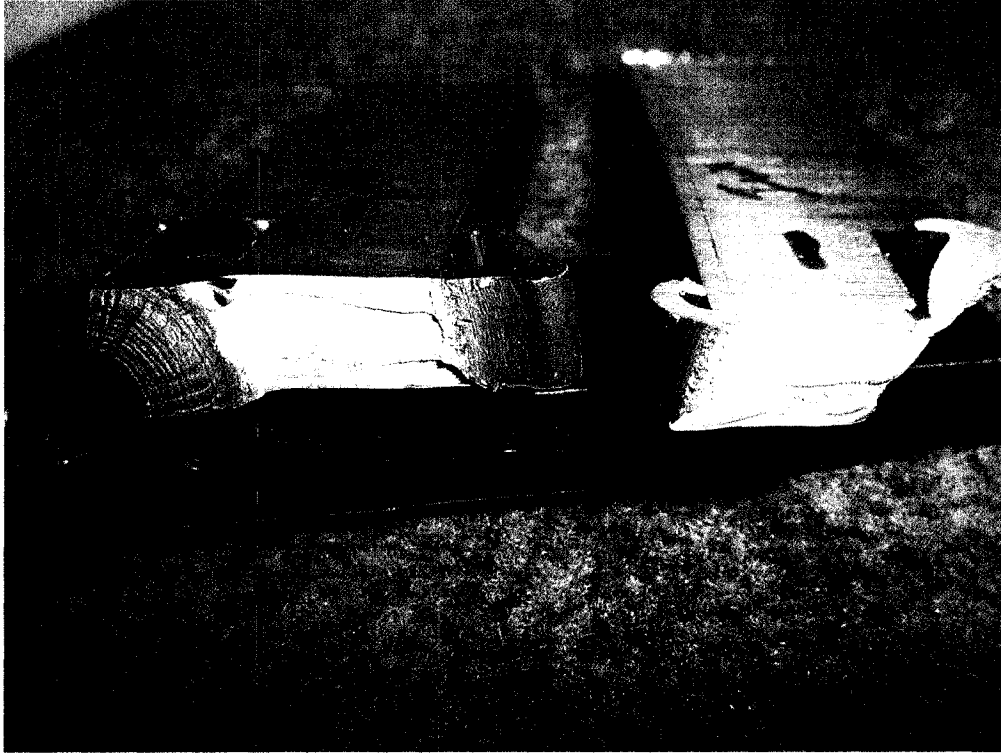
IW1 - Interface of the weld after tensile test
